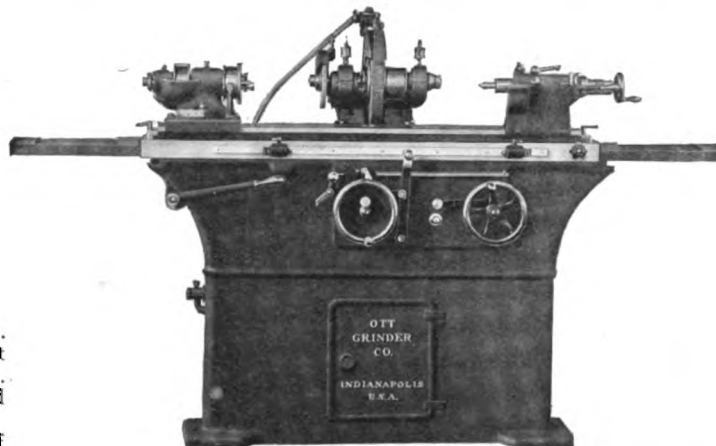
10" x 32" (254 x 813 mm.) Universal Grinding Machine
